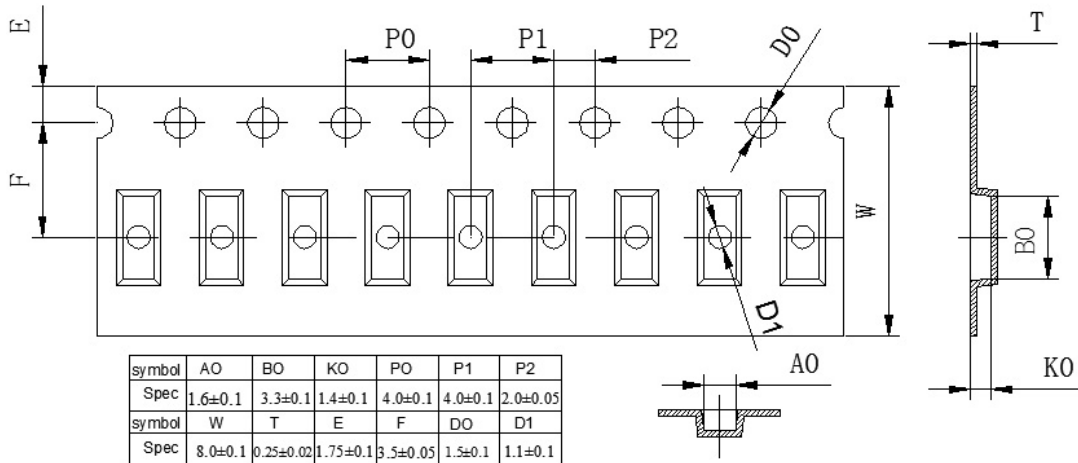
Pocket tape dimensions for LUXEON 3014 with FreshFocus Technology.
